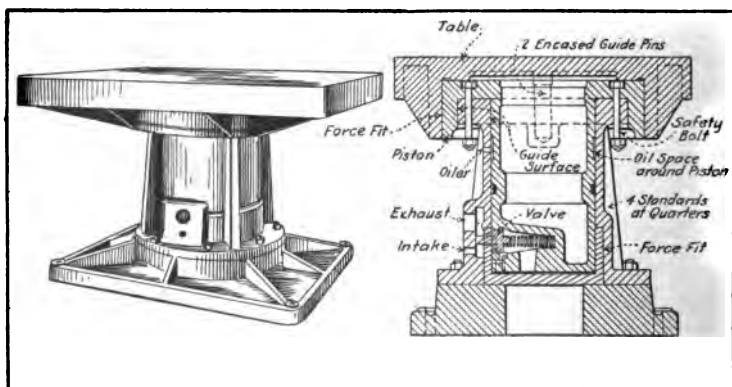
MOLDING MACHINE AND SECTIONAL VIEW
